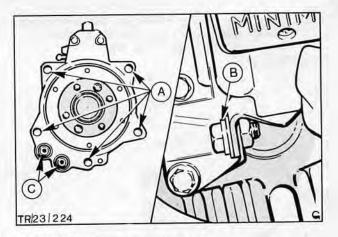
Injection pump mounting point A – Pump front face securing bolt holes
